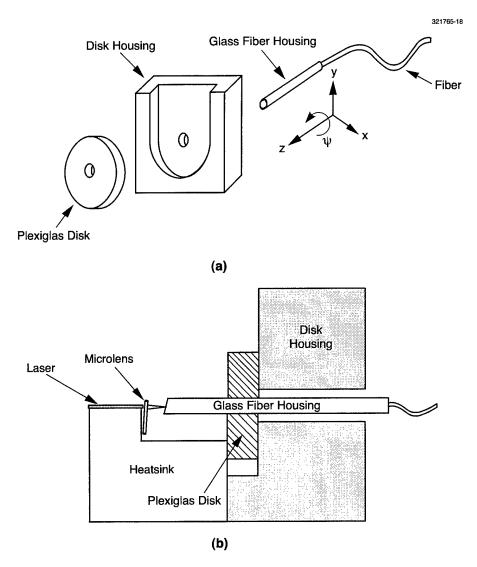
(a) Components of fiber-holding apparatus shown in perspective. (b) Cross-sectional view of same components assembled with laser, microlens, and heatsink.
